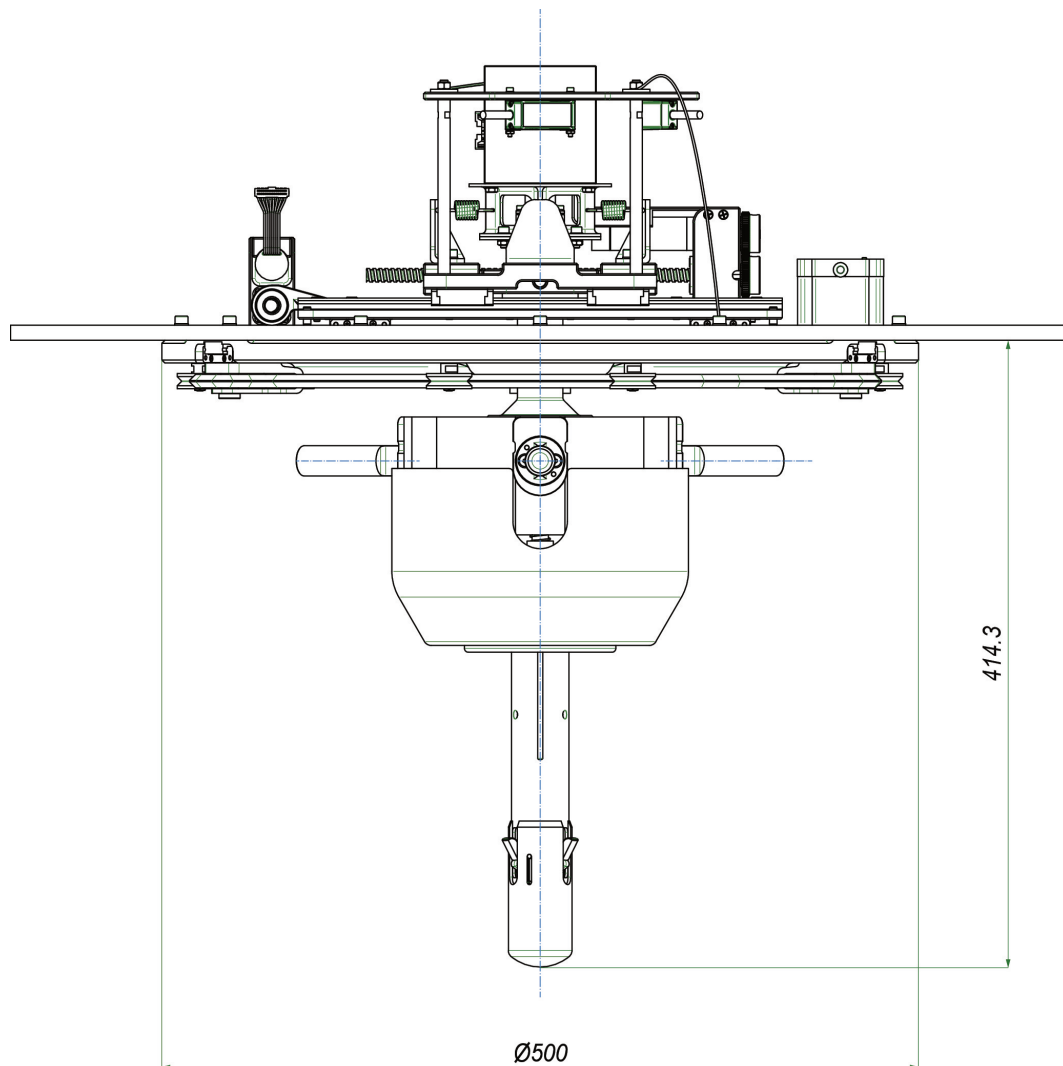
Technical drawing of the male part of the CLAS-S
